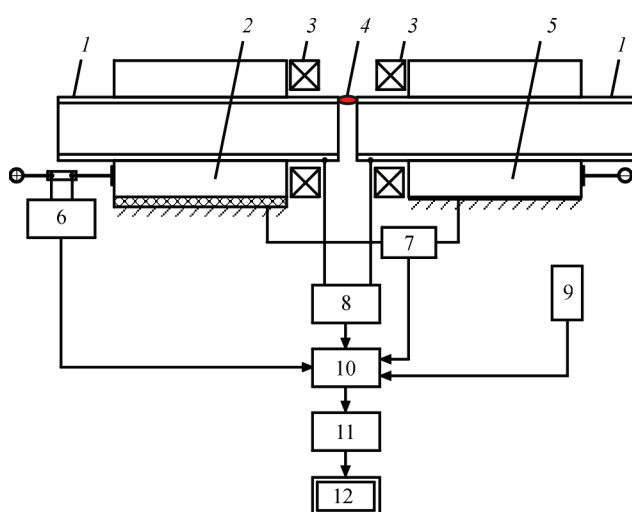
Block diagram of the model of quality evaluation of welded joints: 1 — welded pipes; 2 — movable clamping device; 3 — elements of magnetic system; 4 — electric arc column; 5 — fixed clamping device; 6 — current sensor; 7 — position sensor; 8 — voltage drop sensor on welding arc; 9 — sensor for measuring absolute pressure of hydraulic system; 10 — normalizing instrumental amplifier (with low-pass filter  $F_c = 100$  Hz); 11 — receiving ADC; 12 — industrial computer
